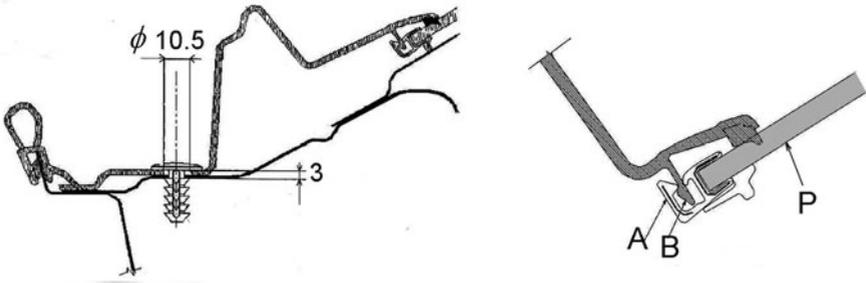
Example of grille below the windshield with different types of fittings. On the right section, a flexible lip fitting to the windshield is shown. A: armed lower windshield gasket; B: grille fastening tooth; P: windshield.
